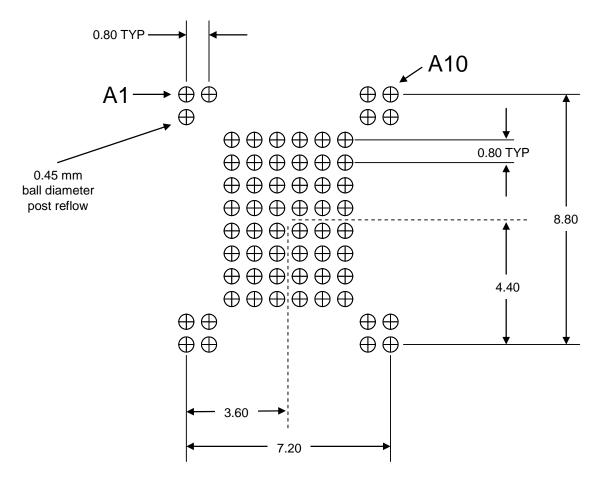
BGA-63 ball spacing requirements (top view, dimensions in millimeters)
